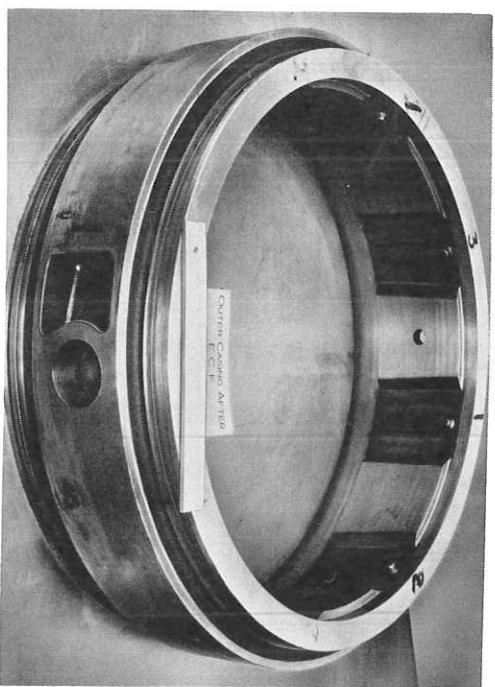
Jet engine casing, with integral "vane ends" and pockets produced by ECM. The process is used extensively to produce this type of component in the gas turbine industry. (Courtesy of the Aero Engine Division, Rolls-Royce Limited.)
